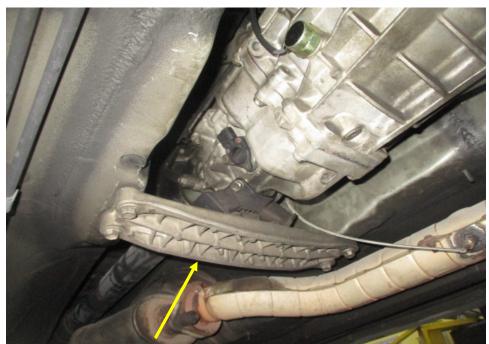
shows a closer view of the bracket (arrowed) that was mounted to the underside of the Motor Car's floorboard, via bolts and nuts. The bracket supports the rear (output) side of the transmission assembly. The bracket was also with rubber bushings that absorbs any vibrations arising from the rotation of the transmission gears, minimising any stress to the bracket.
